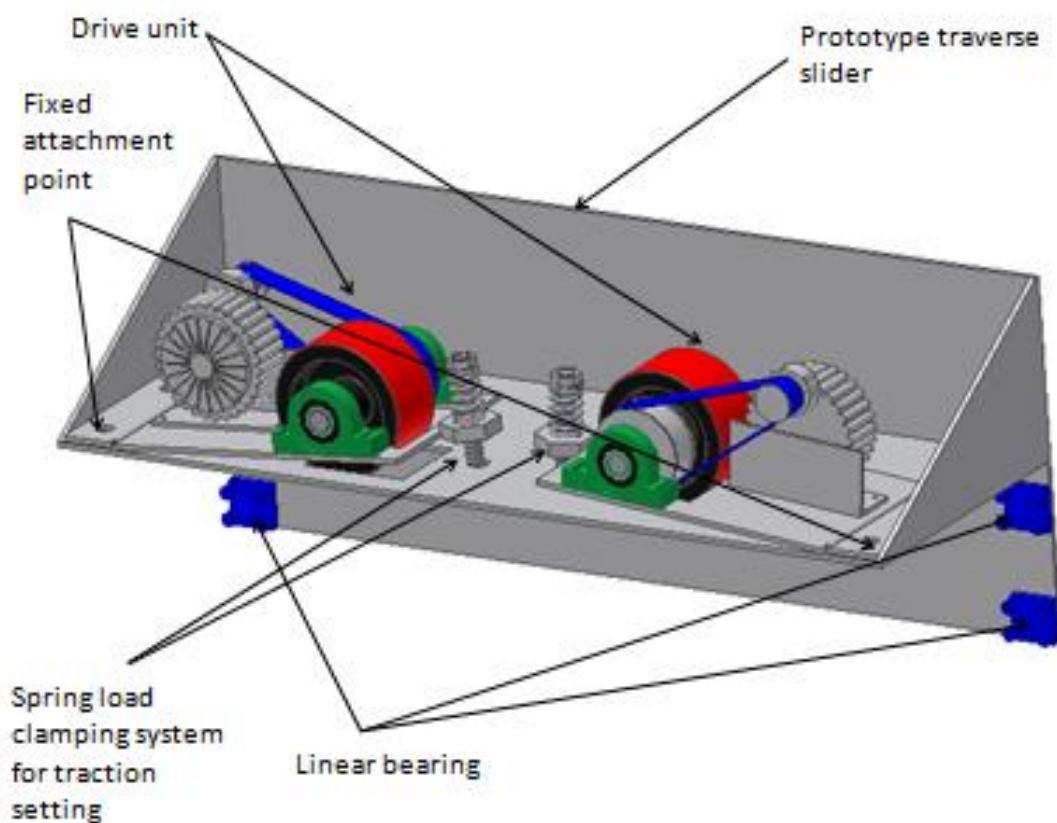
21 Direct drive slider with linear bearing as passive rollers for load support
